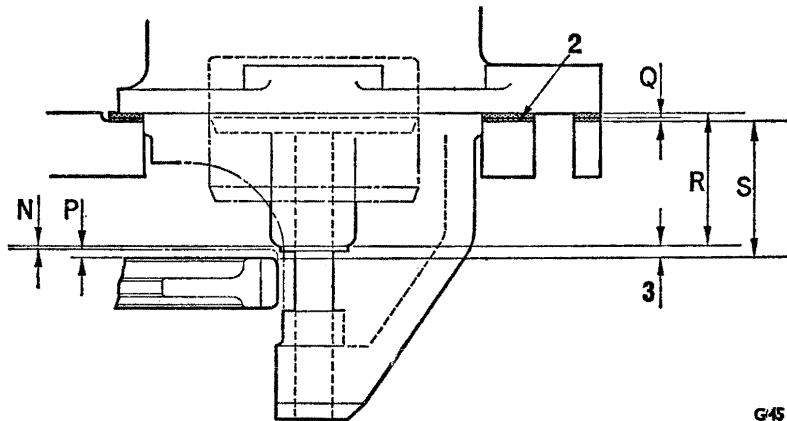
CLEARANCES BETWEEN PINION & FLYWHEEL
